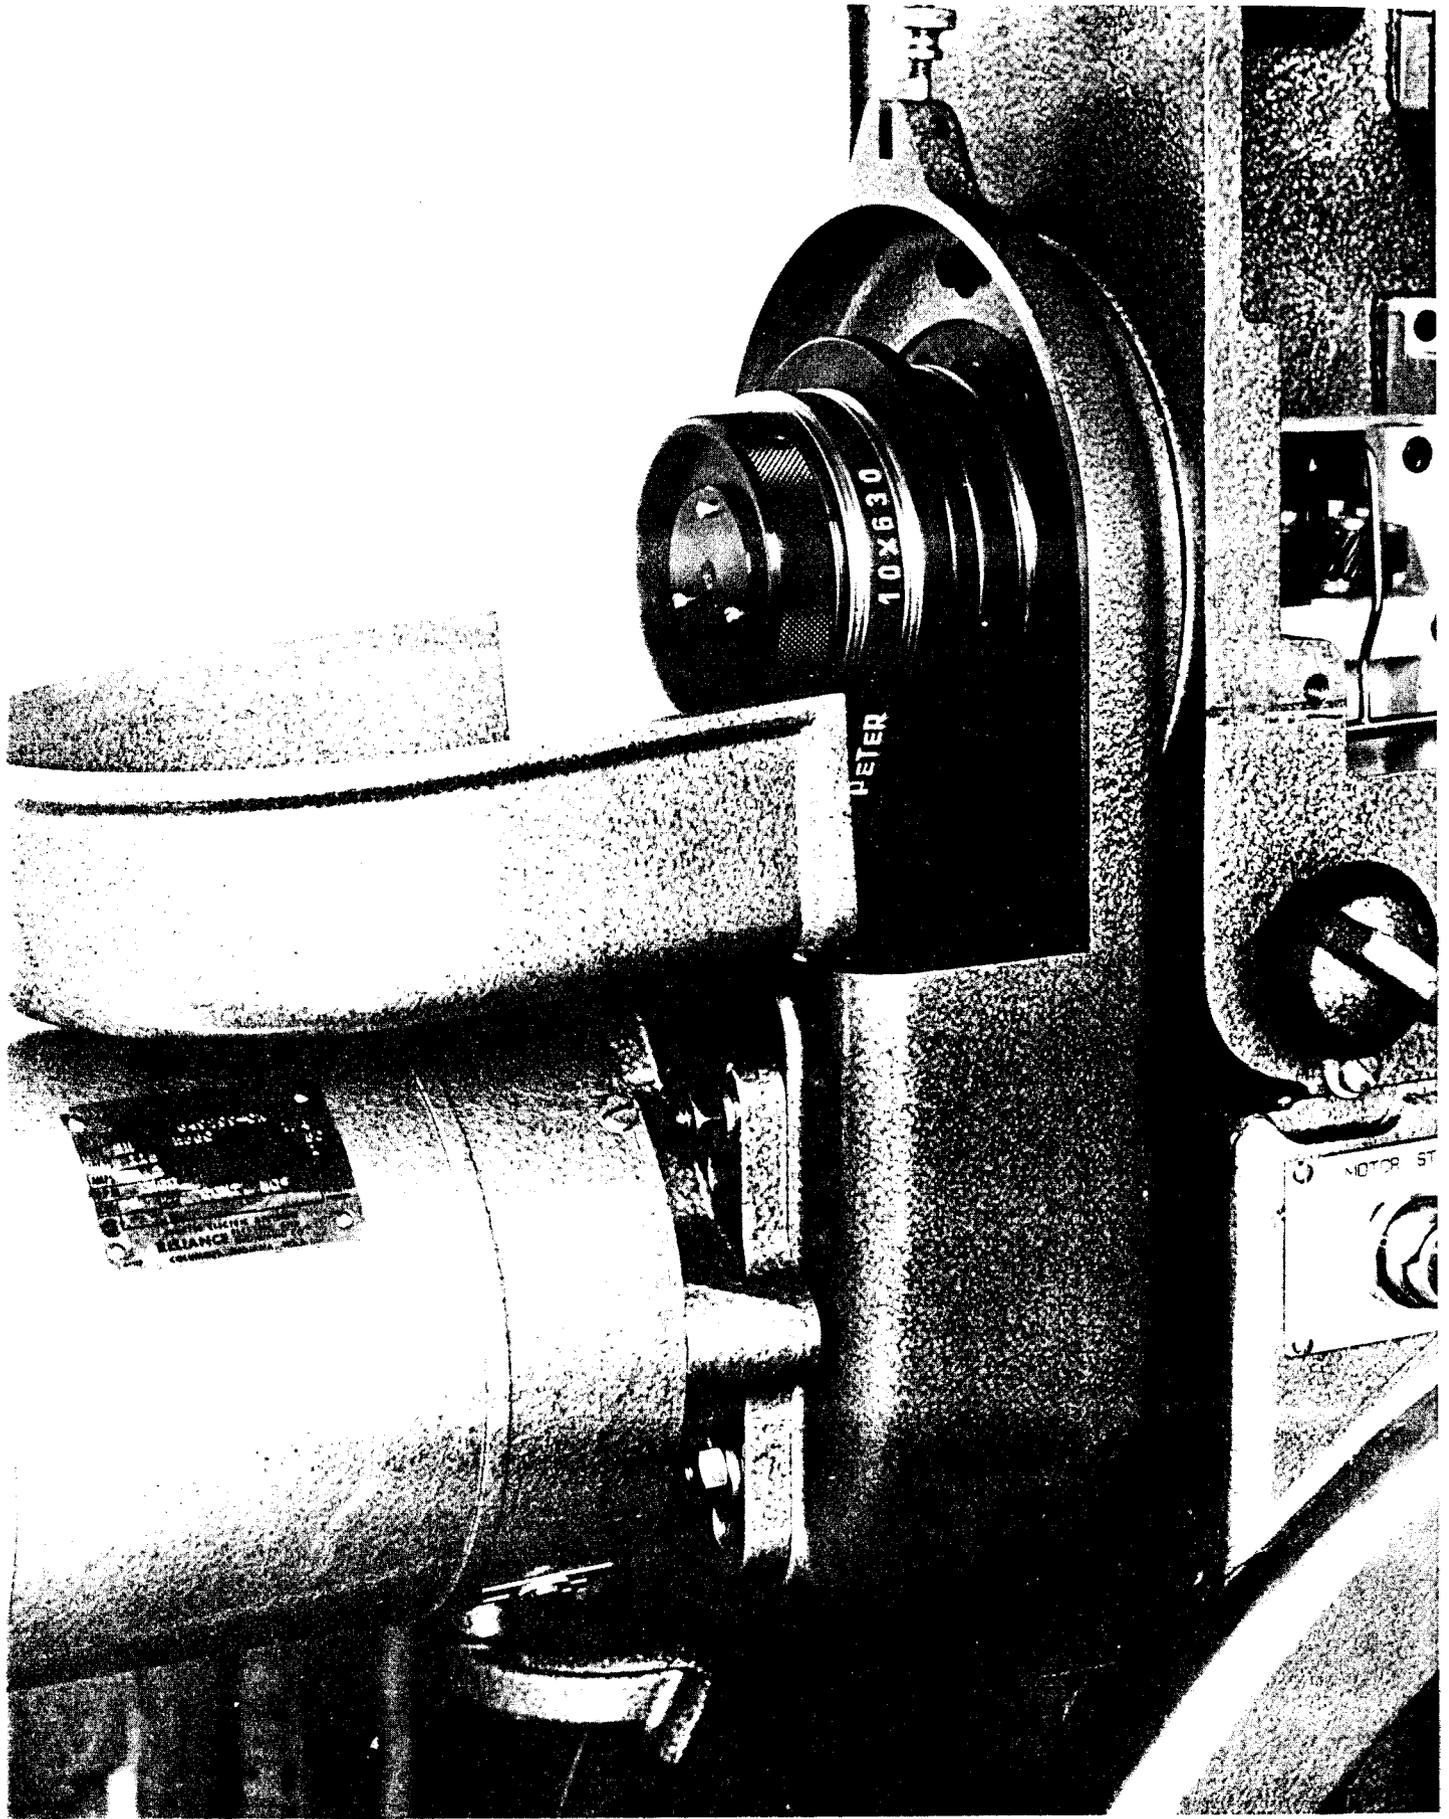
Close-up Motor Drive & 2-Speed Clutch
